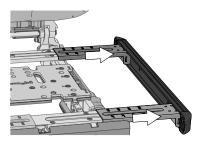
The brackets can be wedged if you do not pull out both simultaneously.
